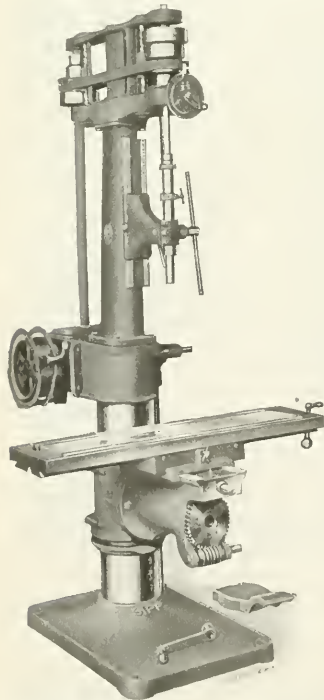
Sipp Crankshaft Oil-hole Drilling Machine with Table in Horizontal Position
